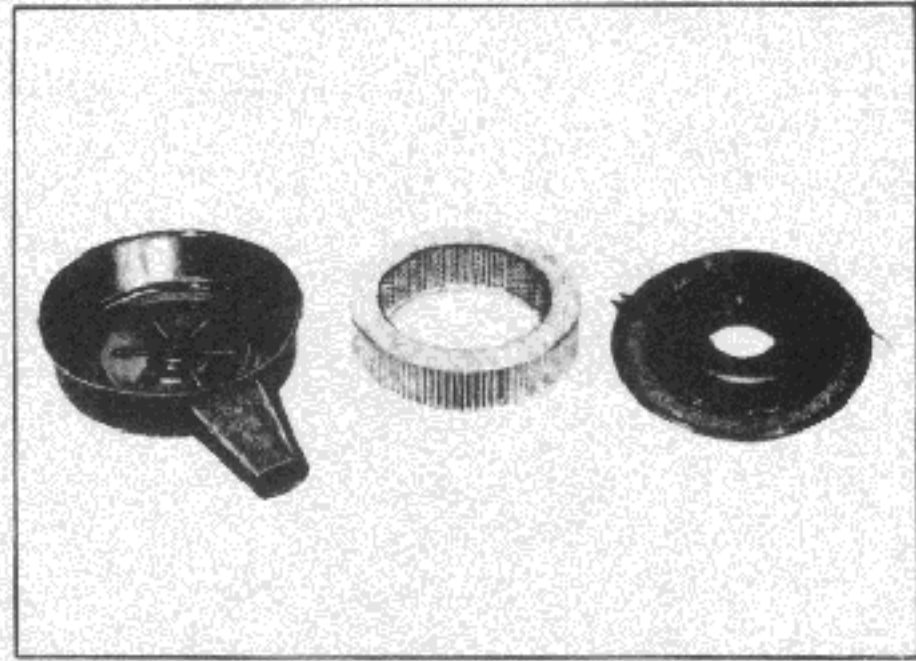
Air cleaner for single carburetor of L20 engine
